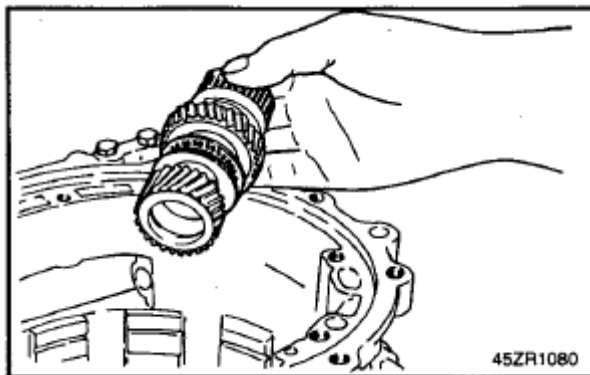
Removing Reverse Sun Gear & Forward Sun Gear Together
